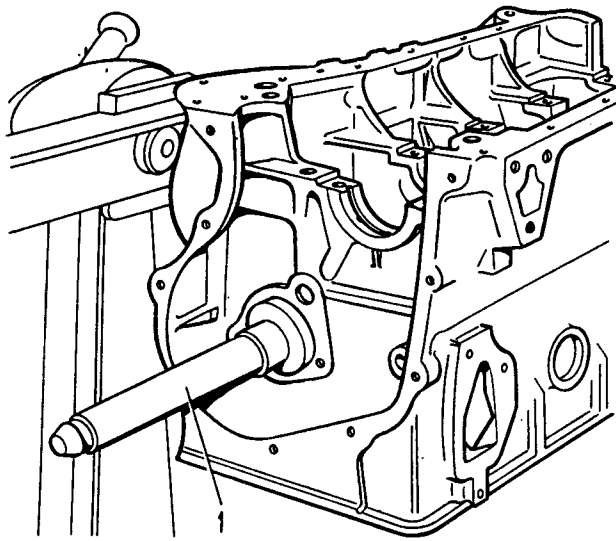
Removal and Installation of Oil Pump Drive Shaft Bushes:
